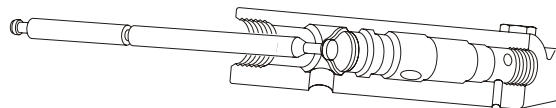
Insert bumper hook through center of bumper and pull straight out.
